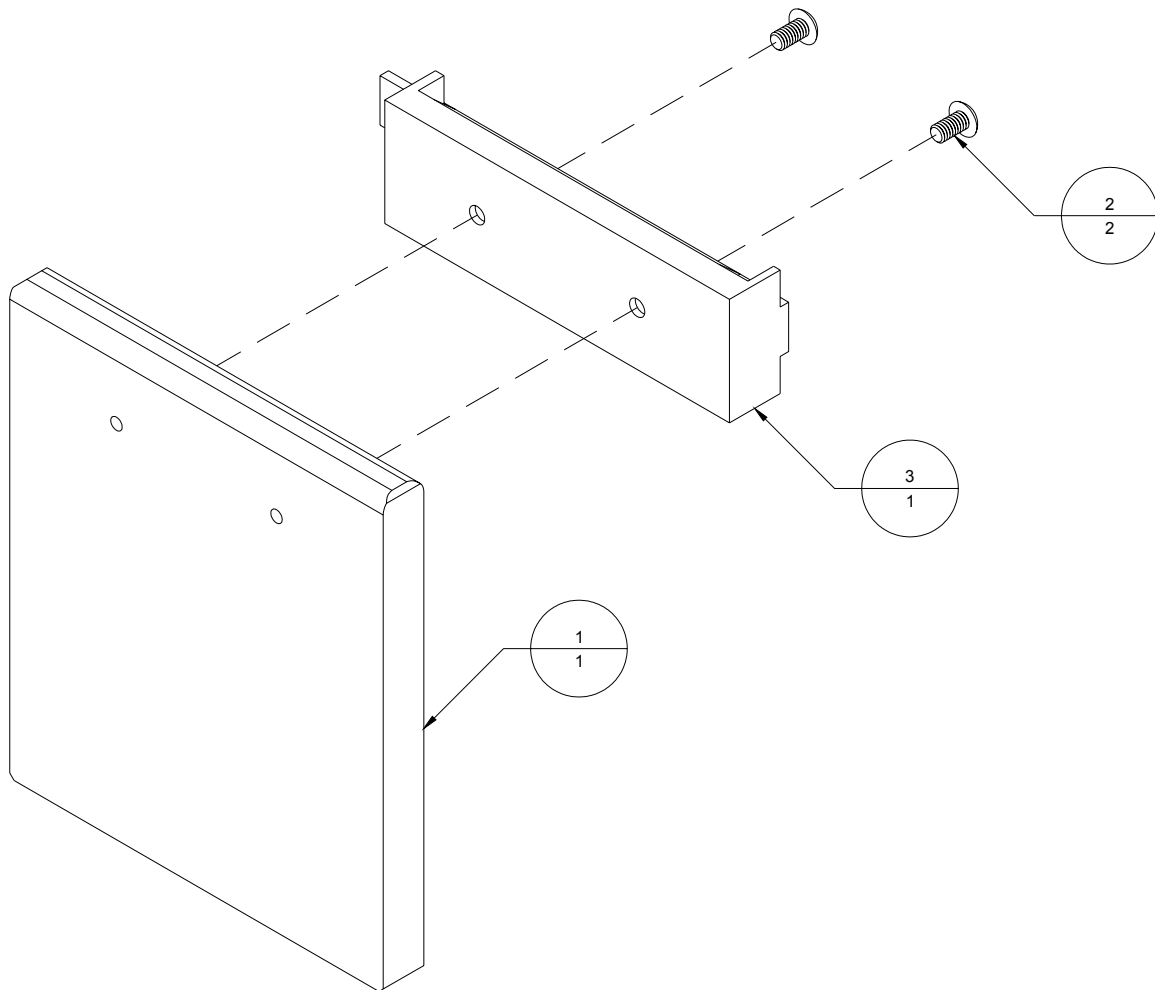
Ribbon Cable Mount Assembly (609300A)
